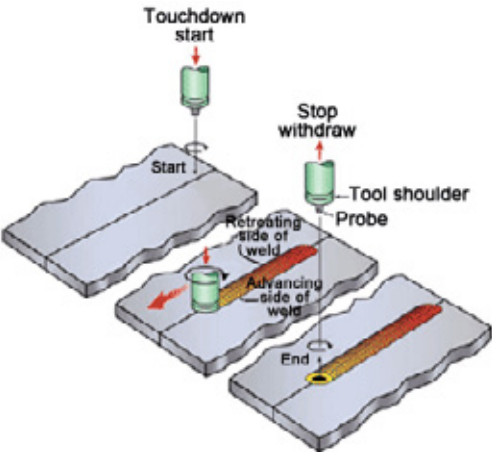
The principle processes in friction stir welding, courtesy of TWI
